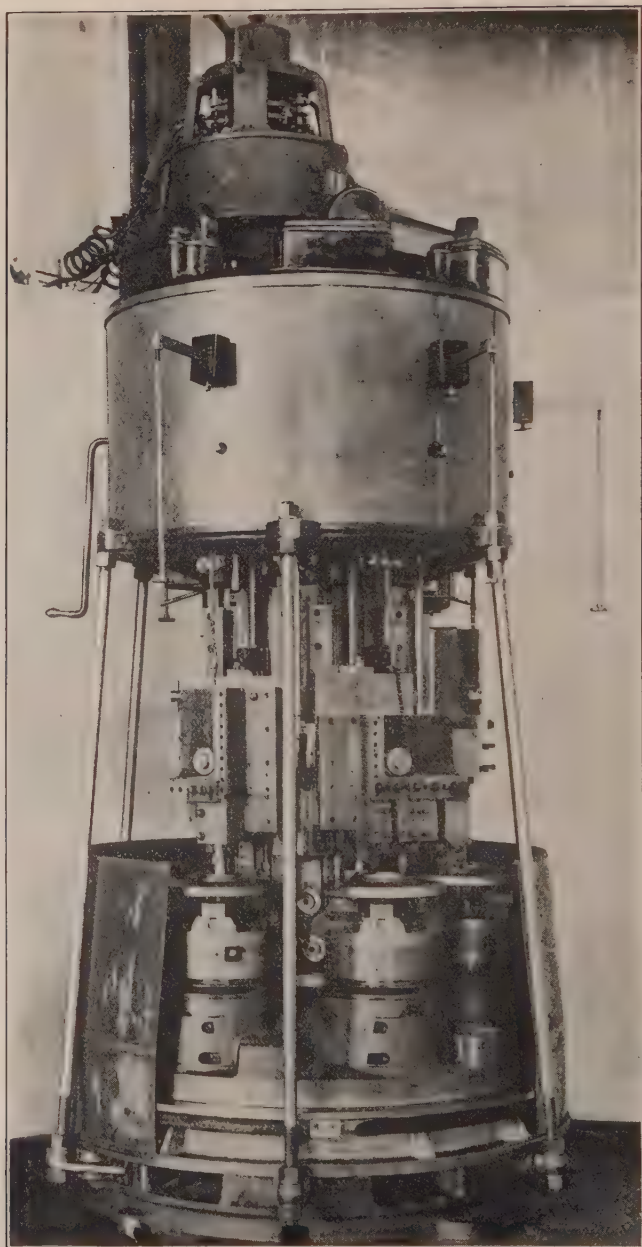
The Bullard "Mult-automatic"—a Multiple-Spindle Vertical Machine for Turret Lathe Work.
